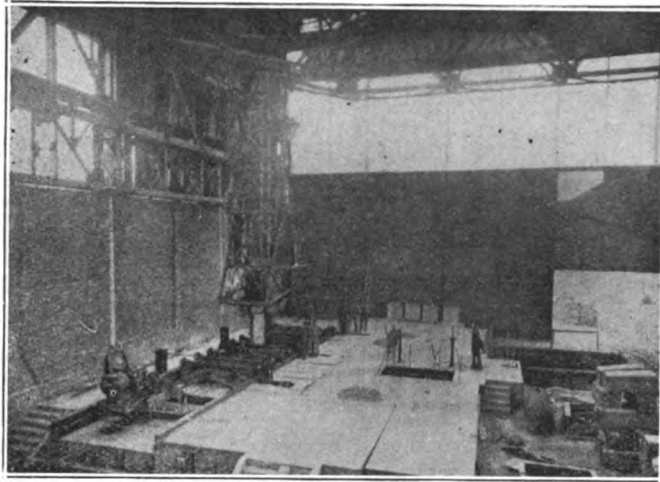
View of soaking pits and combined stripping and charging cranes.
